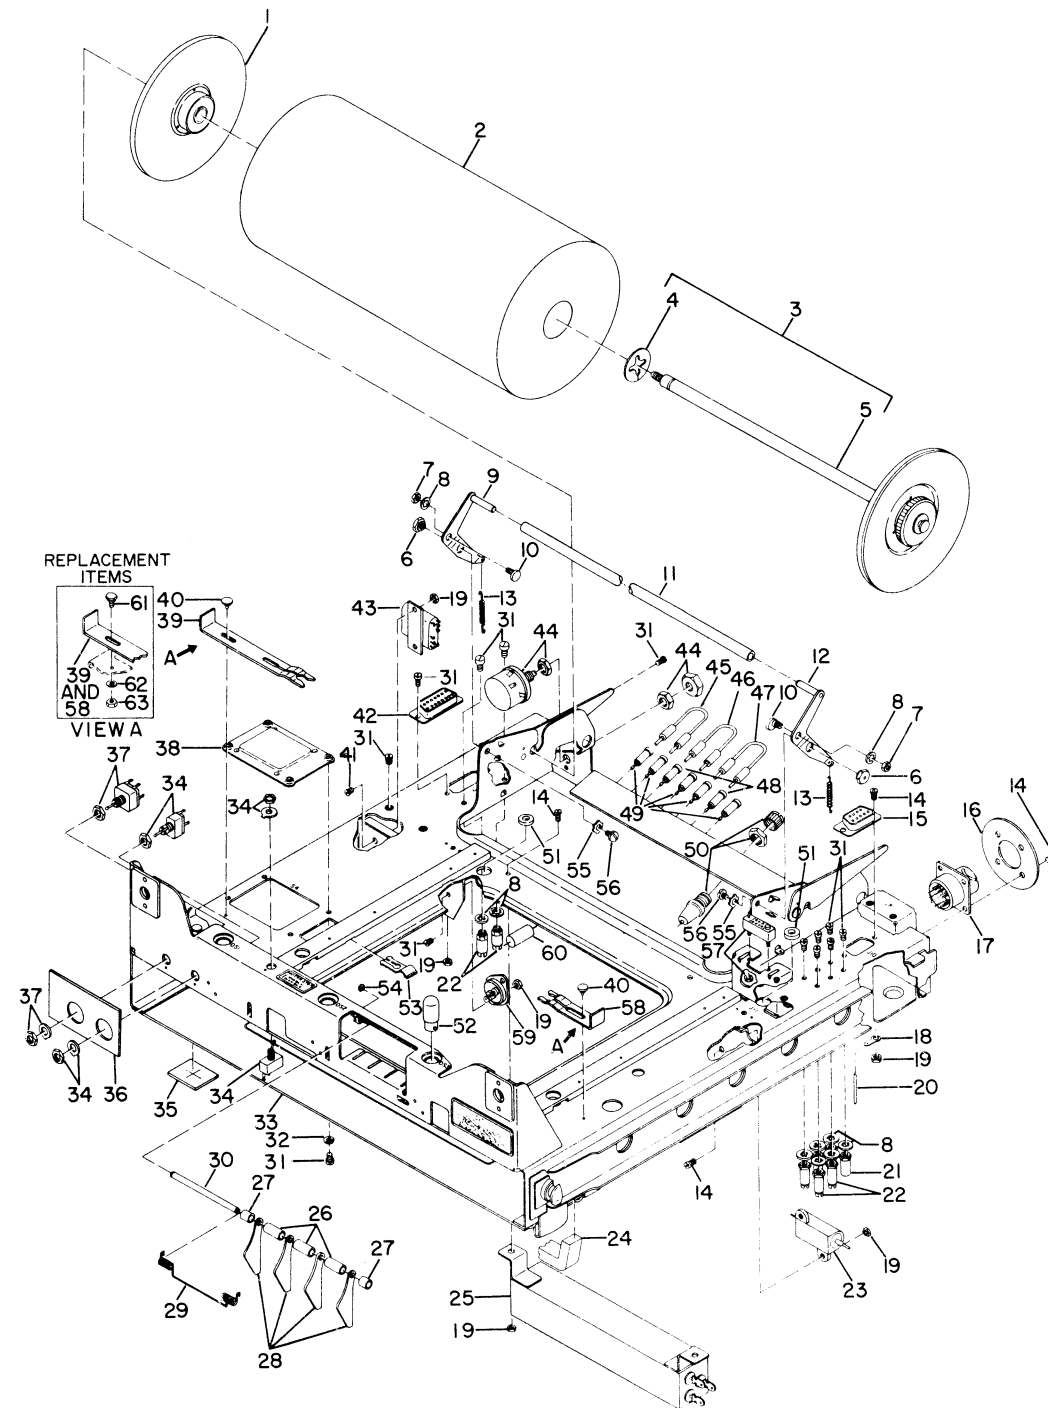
Keyboard Assembly (Sheet 2 of 3)
